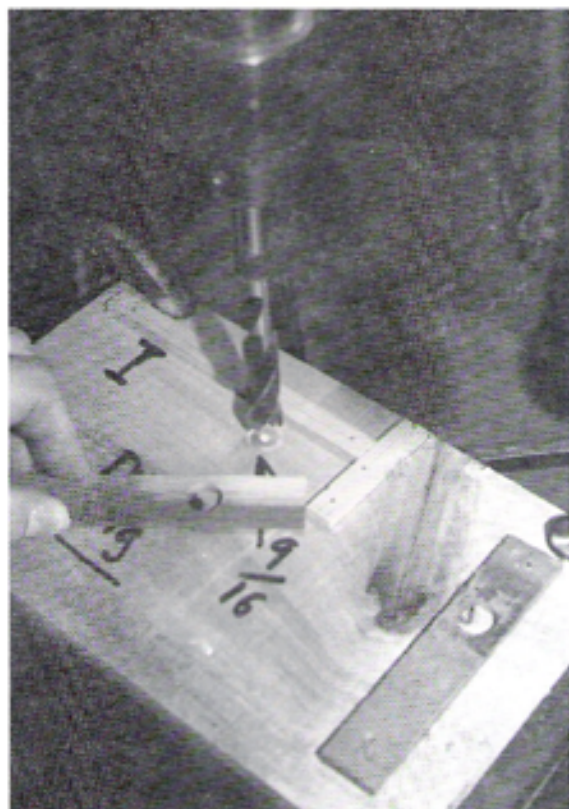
Removing the finished drilled part. Every hole will be in the same place.
